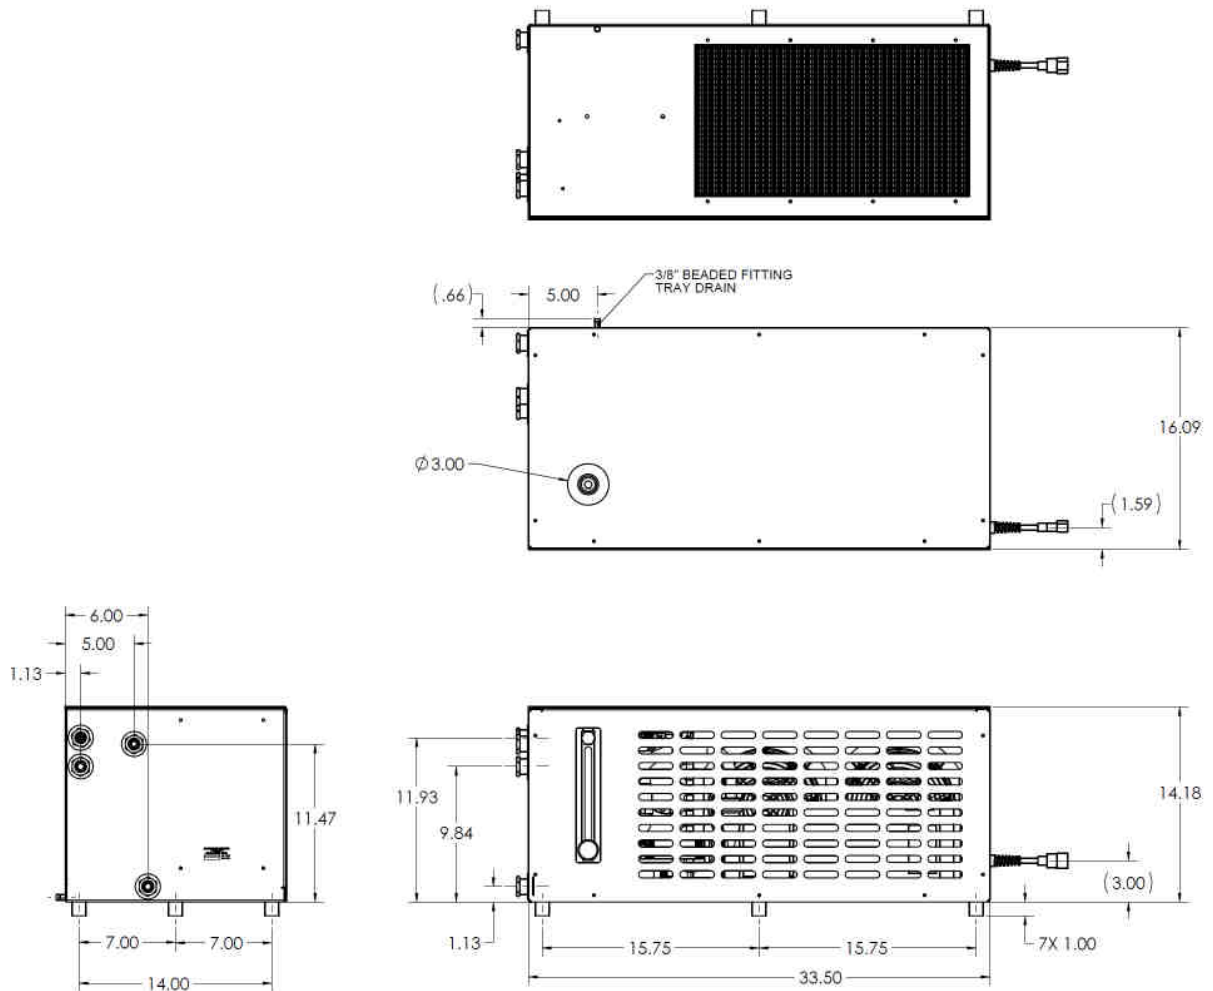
ACCS-5 Drawing (Dimensions in Inches)
